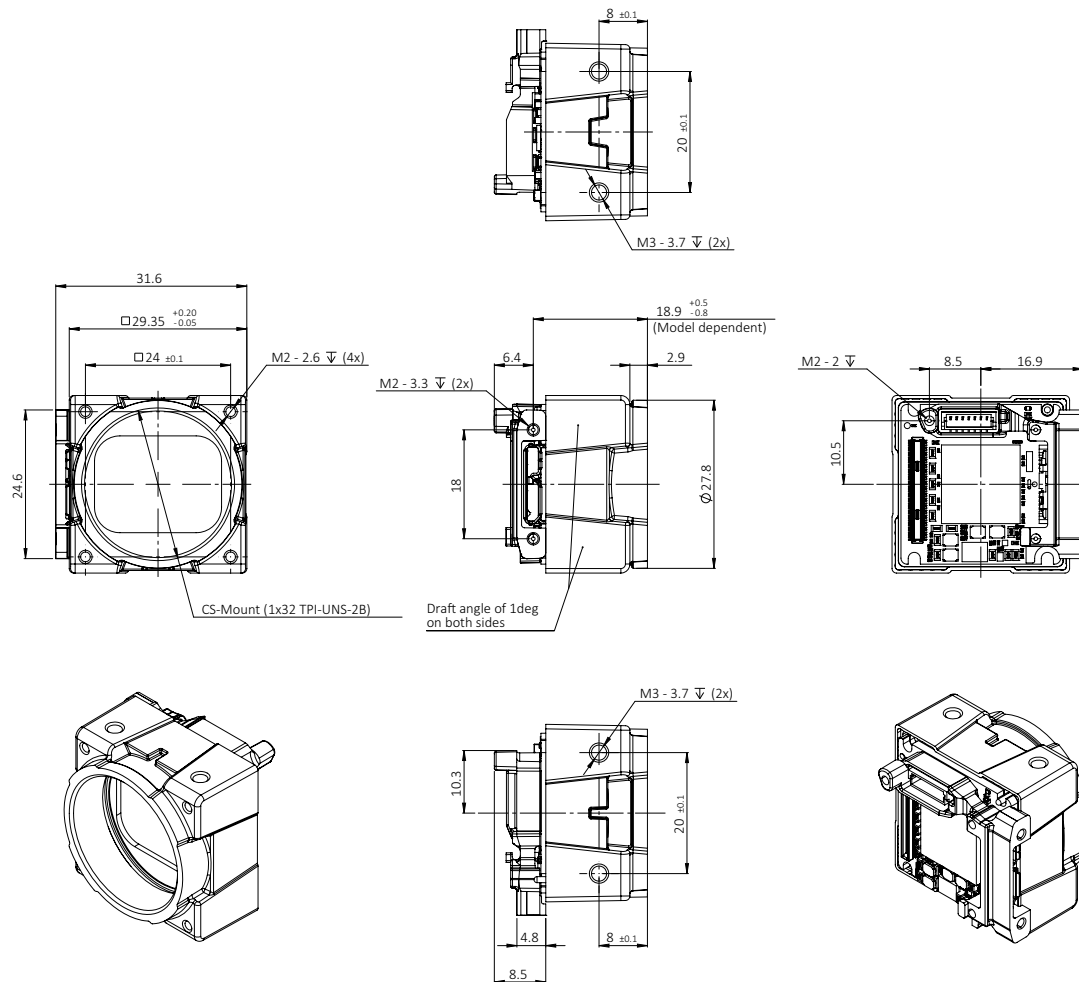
Open Housing CS-Mount 90° (standard Alvium) dimensions
